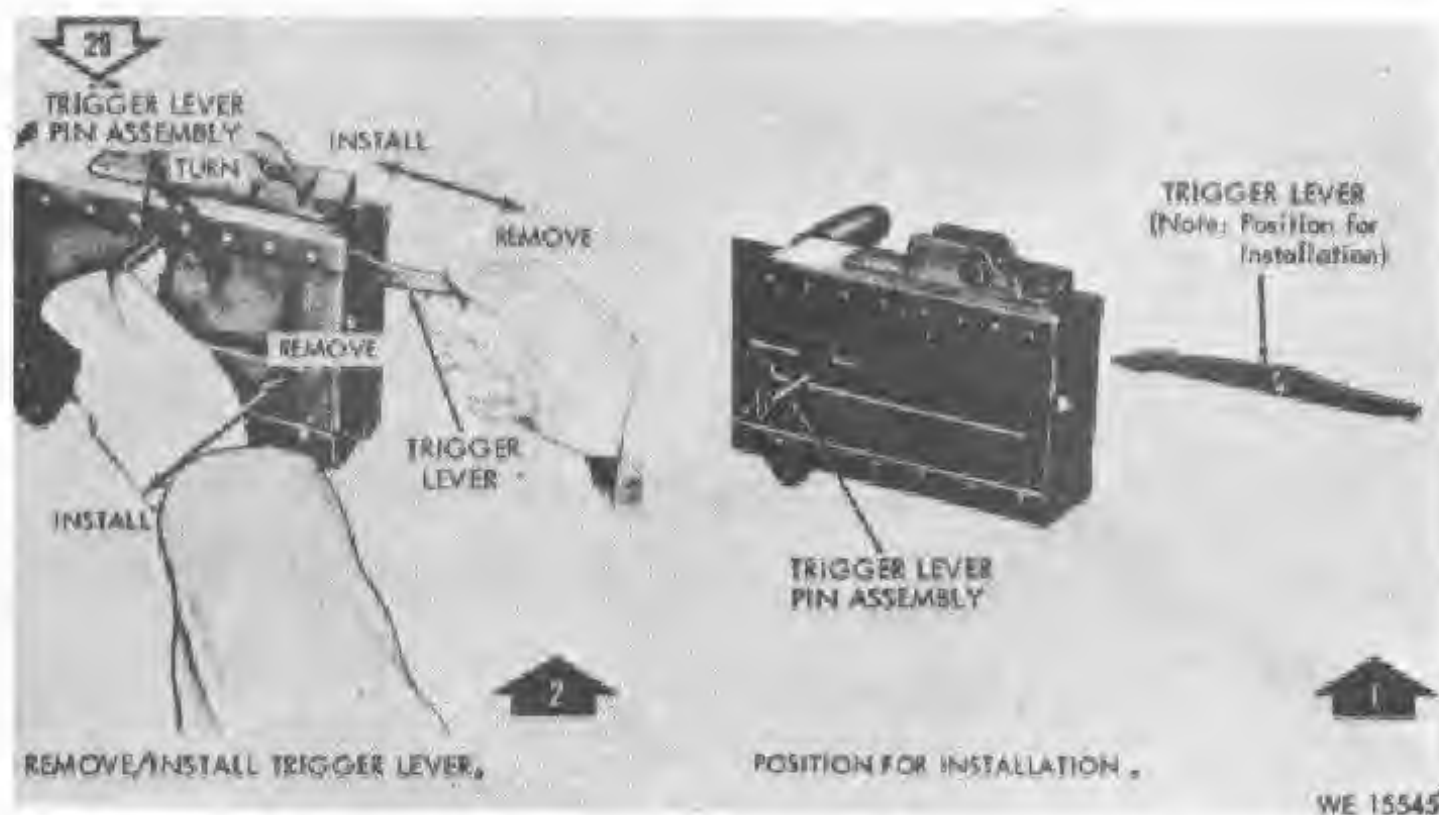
Disassembly/assembly of Caliber .50 Machine Gun, M2. (20 of 20)
